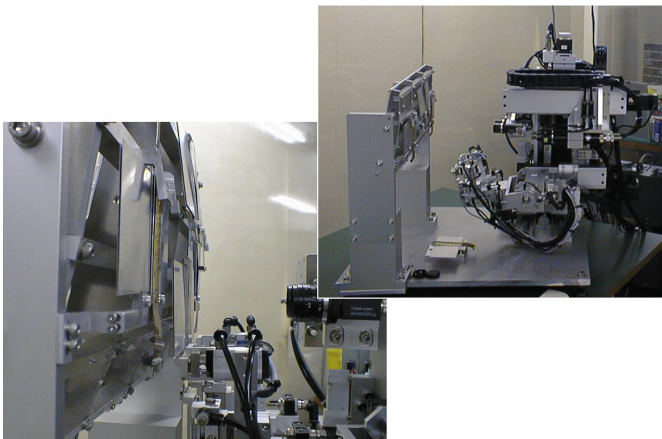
Module-mounting robot for the barrel cylinder. Top inset: overview together with a section of a dummy cylinder for development, and the bottom inset: the robot in action, holding a dummy module and moving toward the final position.
